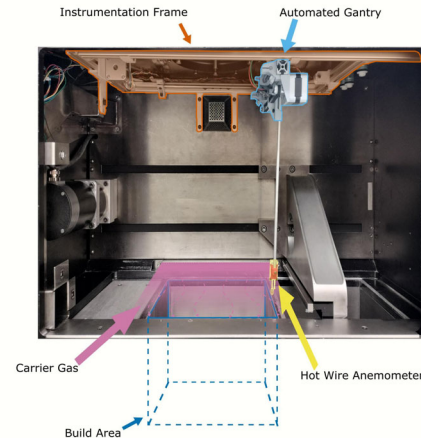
Hot Wire Anemometer setup inside of an LPBF printer
